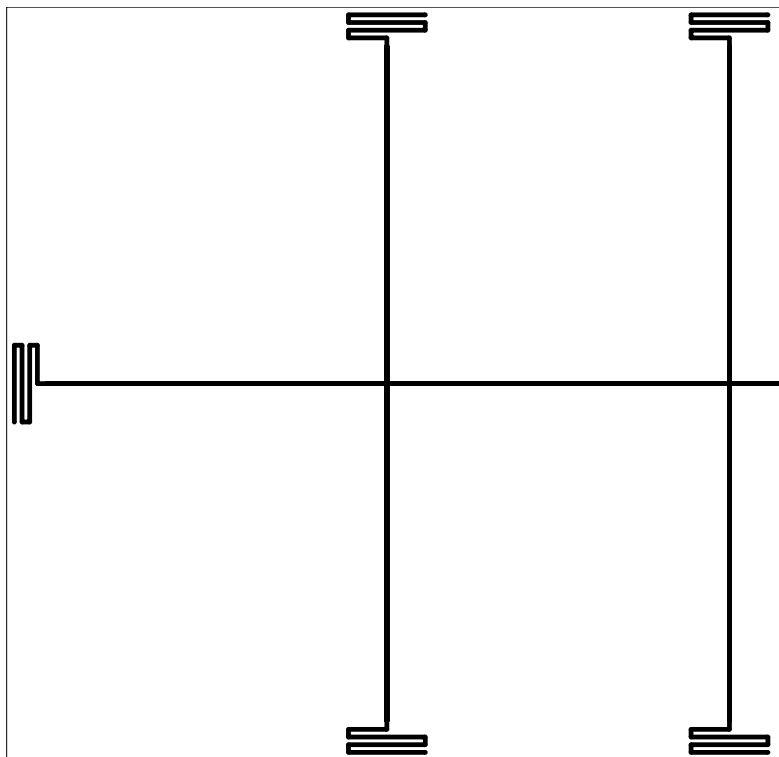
Schematic drawing showing the end four towers of a megatile after the separation grooves and epoxy storage labyrinths have been machined.
